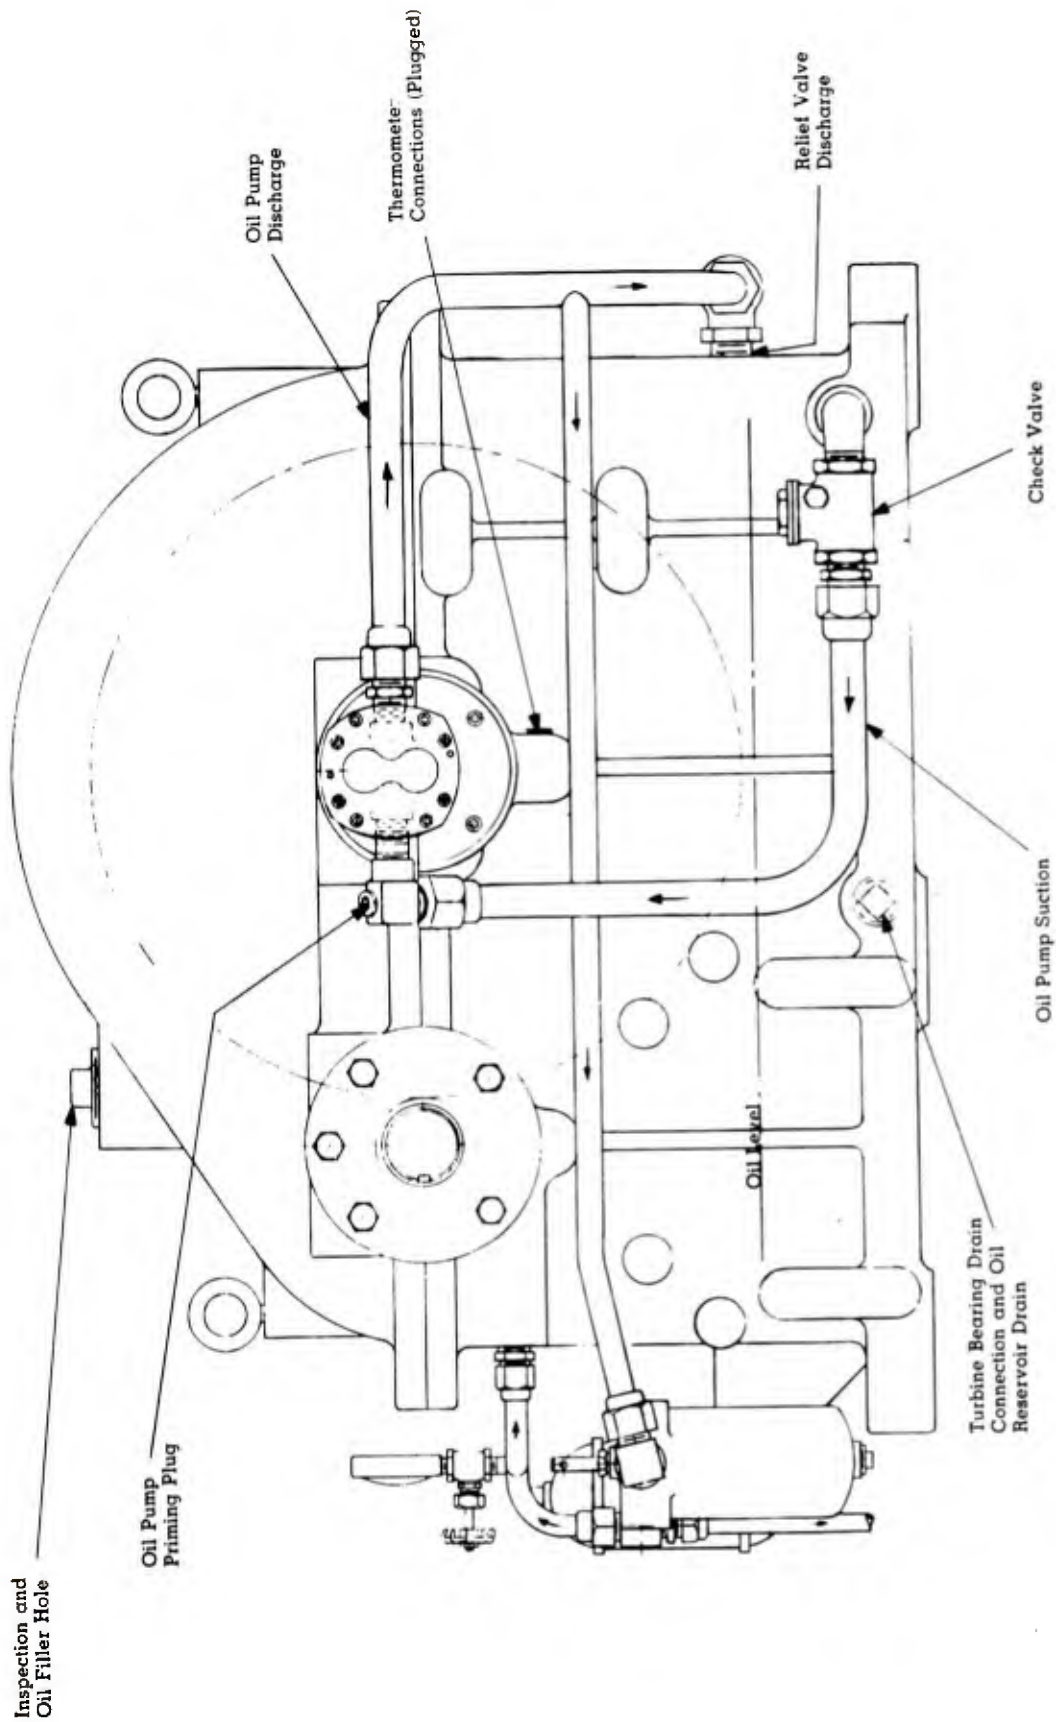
(B)--Elliott lubrication arrangement drawing
